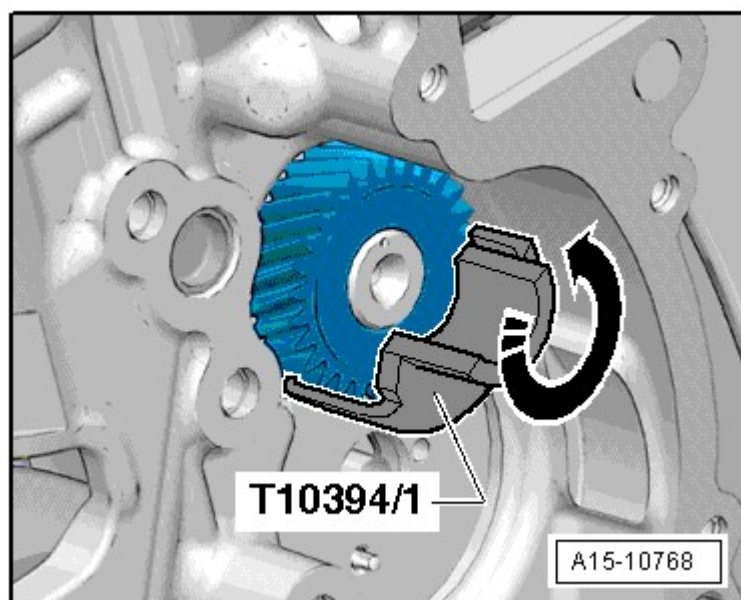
Identifying Intermediate Shaft Sprocket
